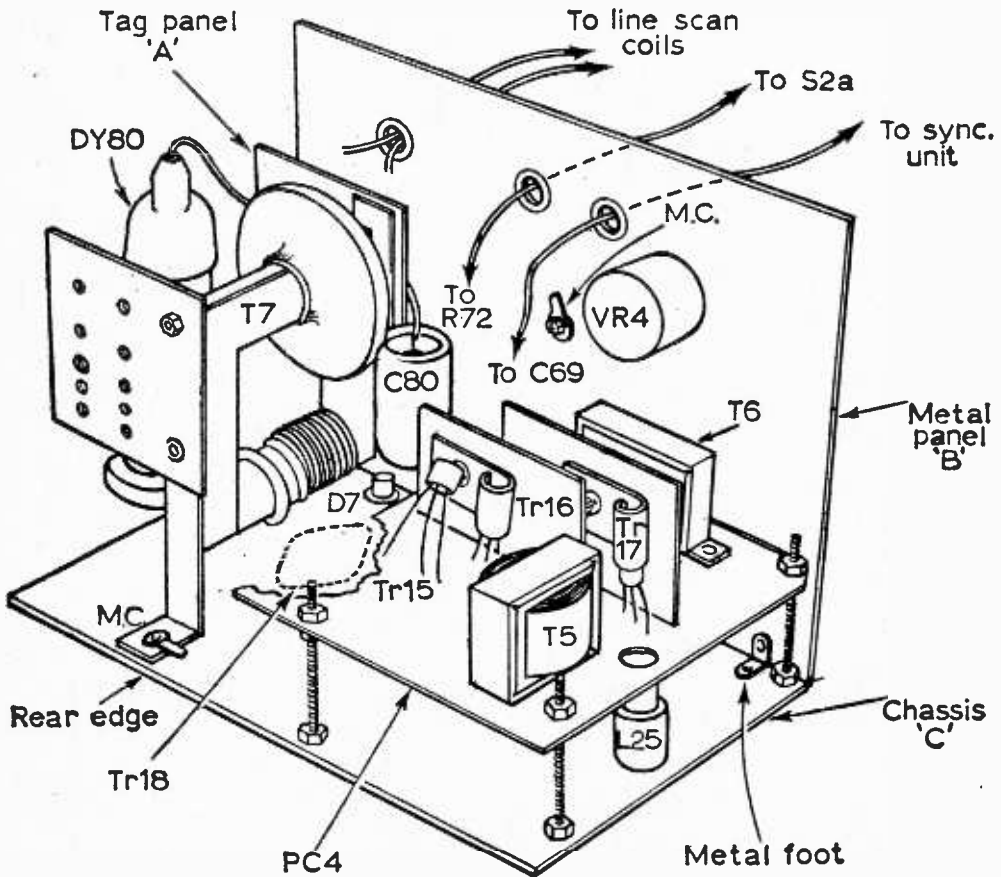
The complete line timebase unit. This shows how the component parts—the line output transformer, PC4 board, chassis "C", etc.—are related when the unit is made up. Note the mounting arrangement of Tr18 (see also Fig. 26) beneath chassis "C" which acts as its heat sink.
